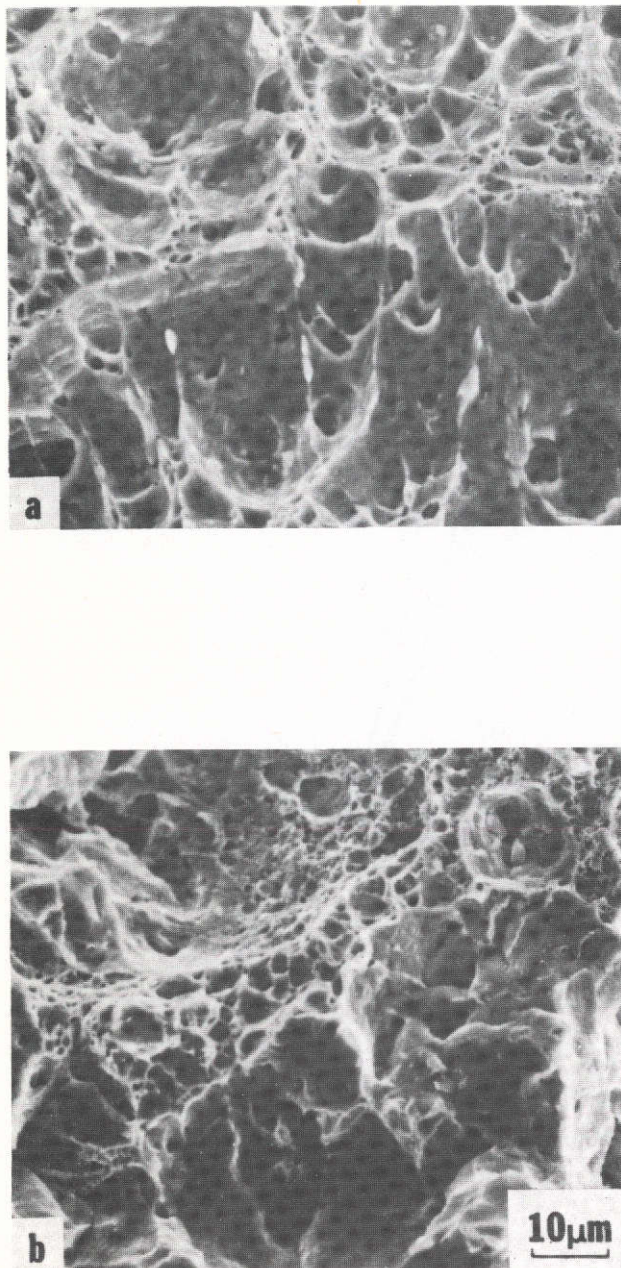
Scanning electron fractographs of as austenitized 16% Mn-0.05% C (a) tested at 22°C, (b) tested at -196°C Charpy fracture surfaces.
